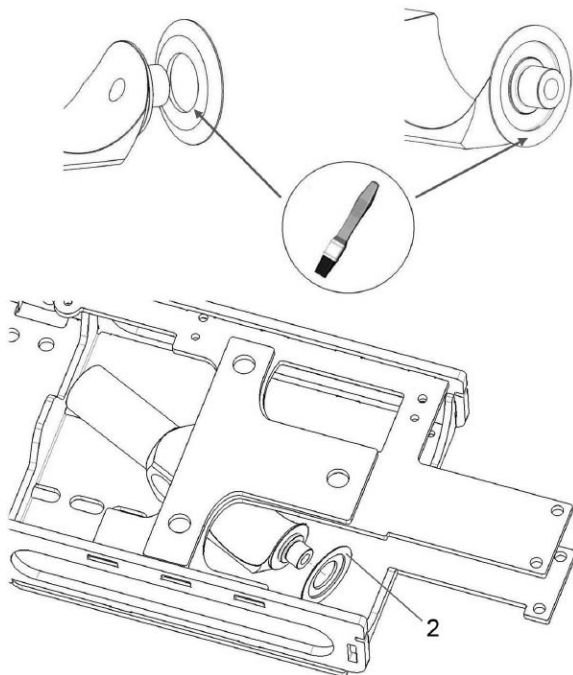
Lubricate the contact surfaces of the slide washer with grease.
